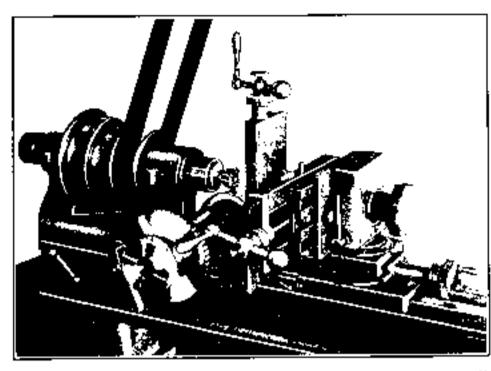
Tail end view of Milling Attachment set to mill teeth in a Milling Cutter
